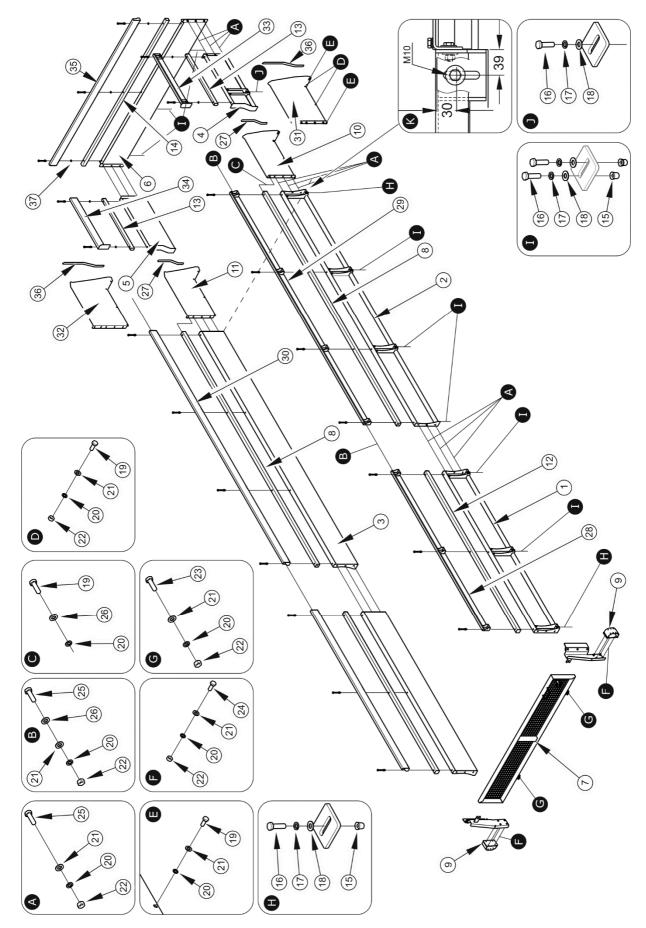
Installation of wall extensions. Marking according to table A.1
